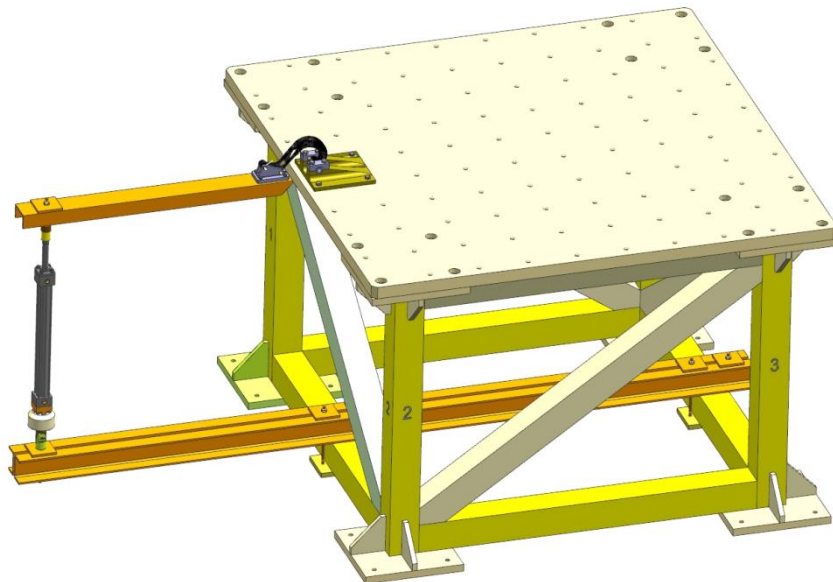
Clean Sky I Design of Demonstrator Test Fixture
